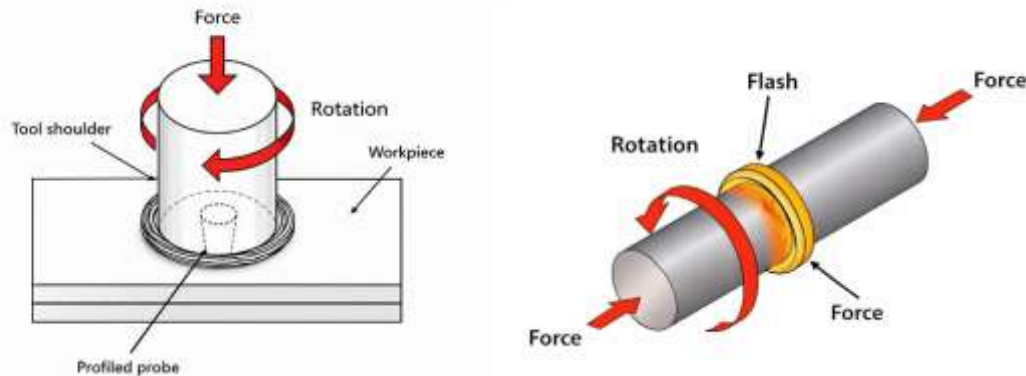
Schematic illustration of the friction welding mechanism
